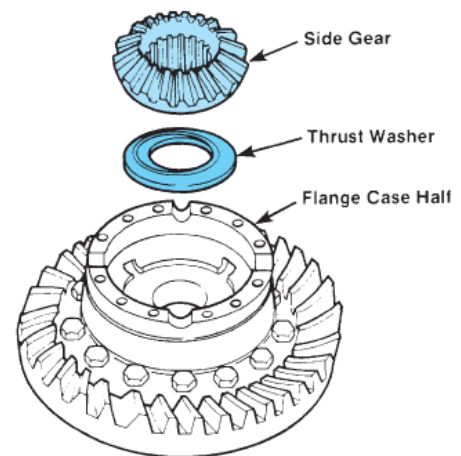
Correct orientation of the thrust washer and side gear. Lubricate all internal parts with axle lube before installing into
